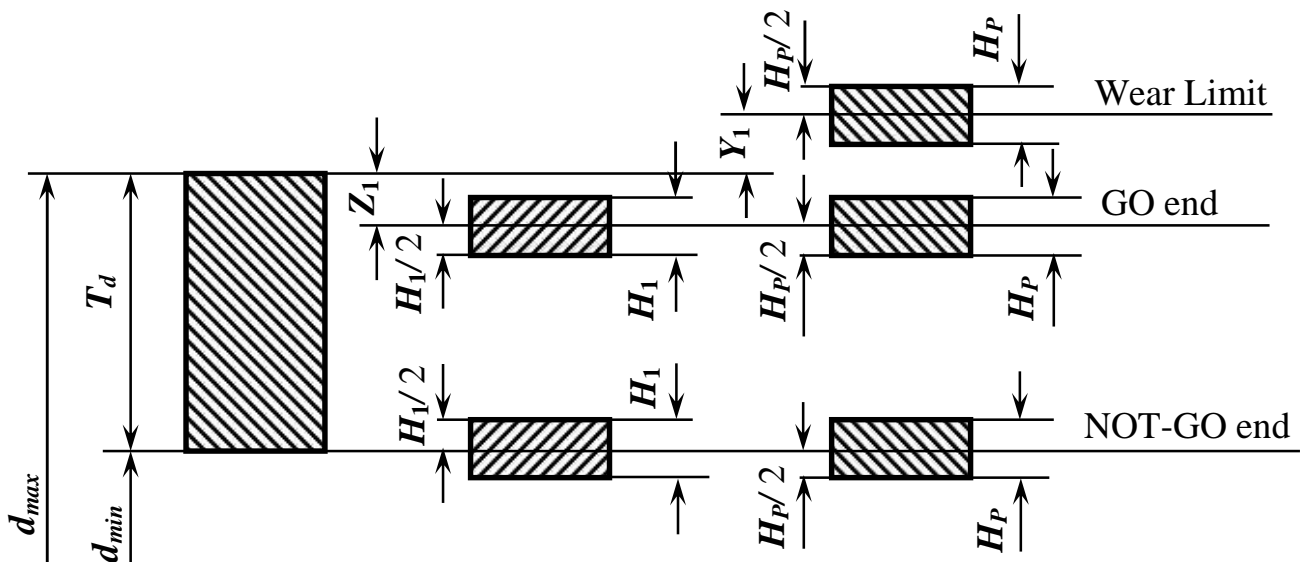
Tolerance bands of gauges for shaft part
